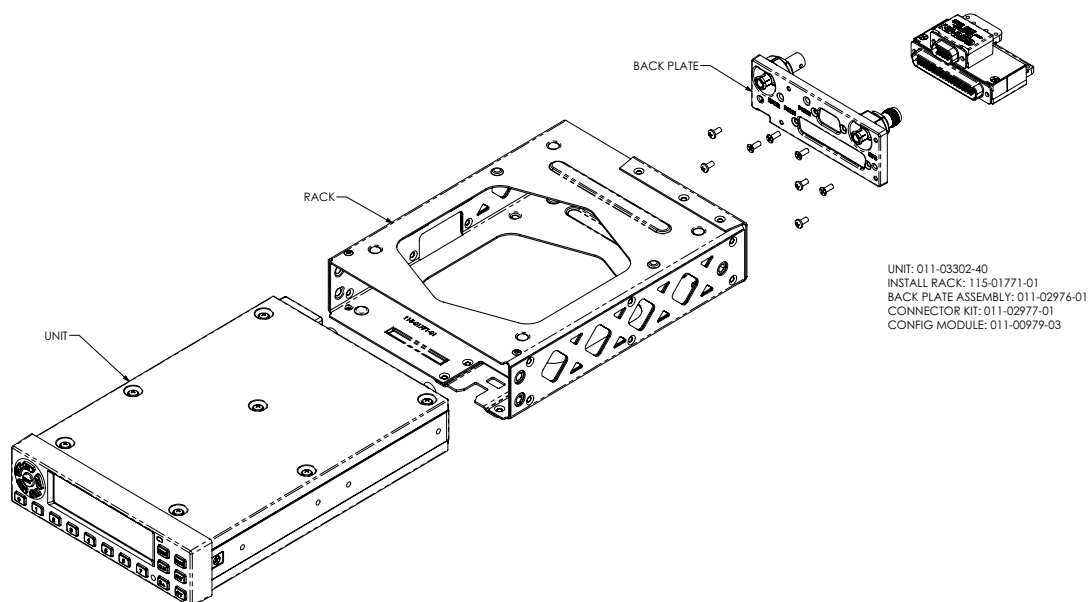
GTX 3X5 Mounting Rack/Connector Assembly
